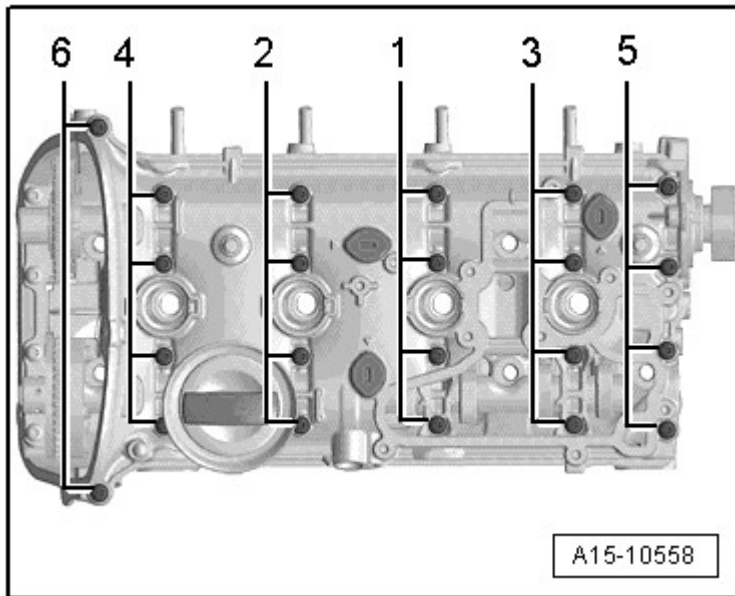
Identifying Cylinder Head Cover Tightening Sequence
